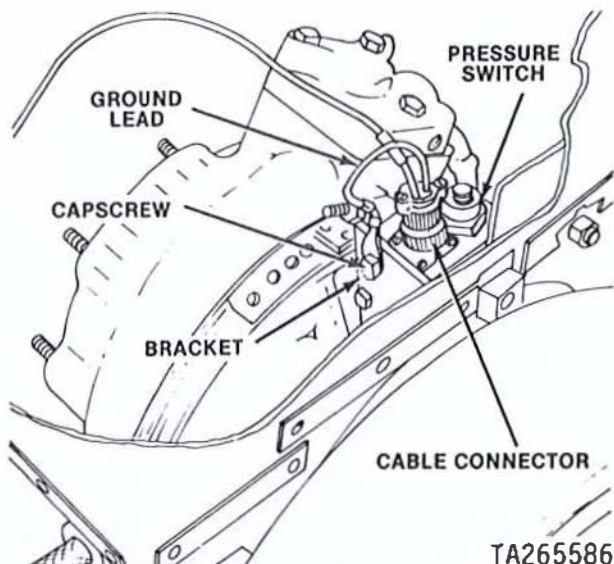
Removing or Installing Starter and Dust Detector Electrical Cable
